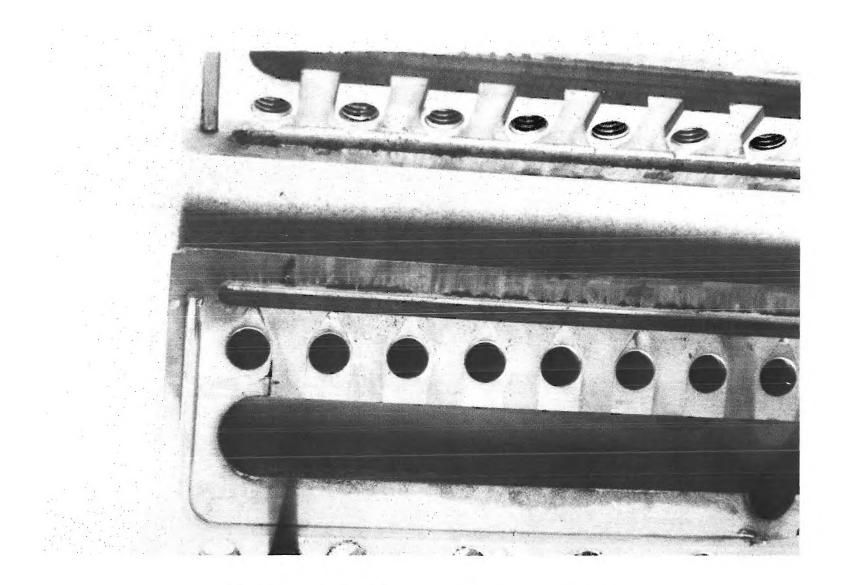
MACHNOZZLE PLUGGED WITH CONTAMINANTS.
